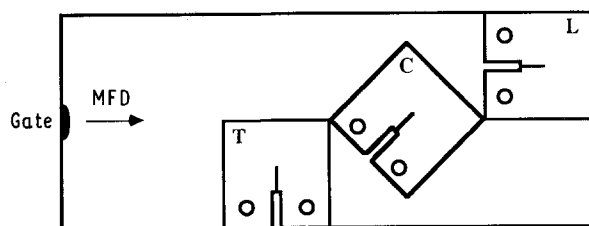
Cracks with respect to plaque geometry (MFD, mould fill direction).
